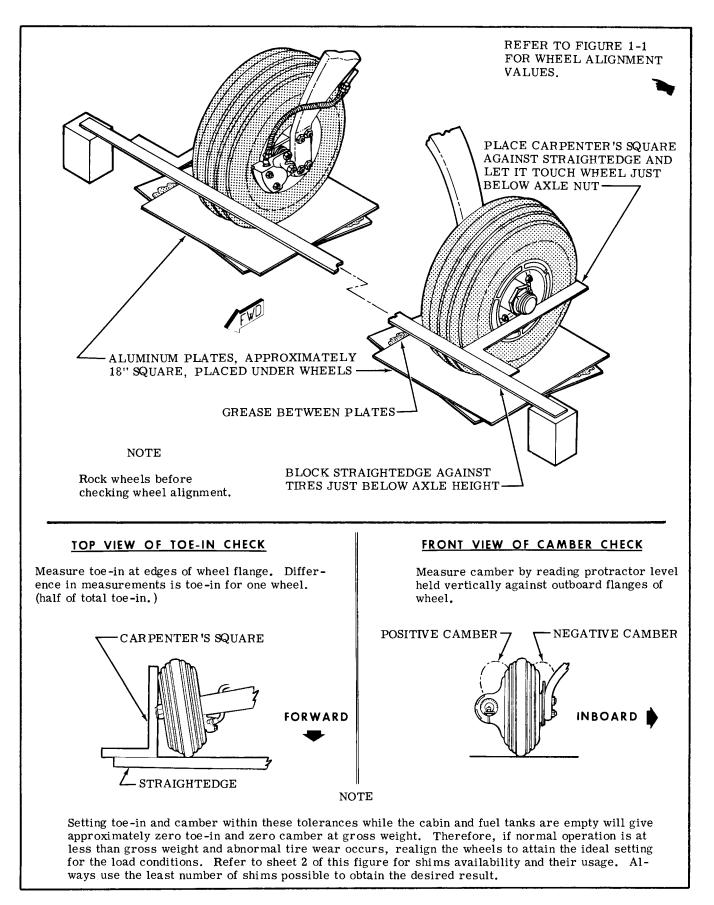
Main Wheel Alignment (Sheet 1 of 2)
